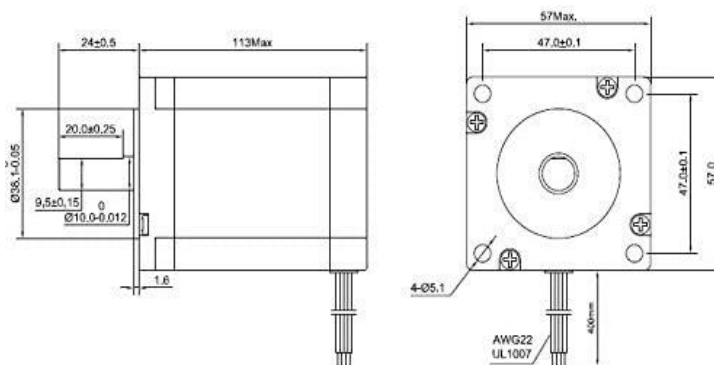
Nema 23 Bipolar Stepper Motor Dimensions
